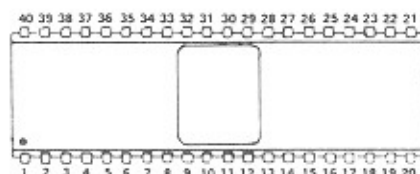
TYPICAL MODULE PACKAGE ASSEMBLY
